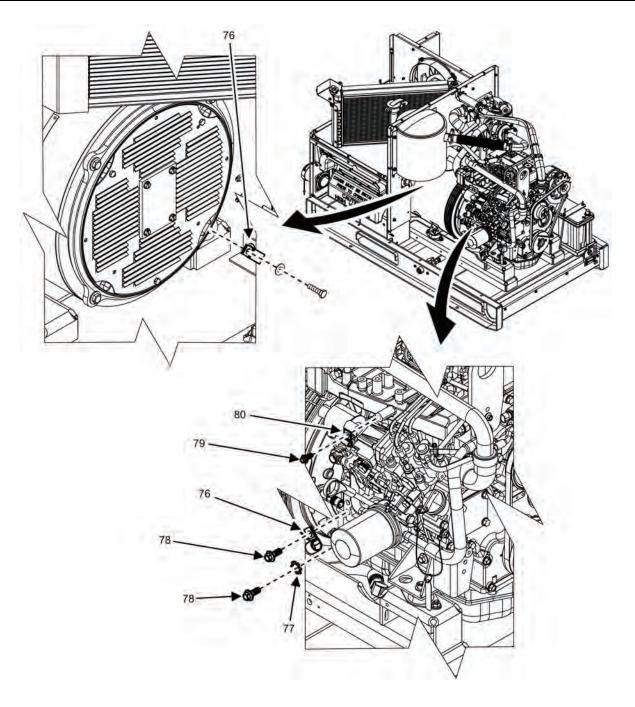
Engine Wiring Harness (Sheet 11 of 15).
